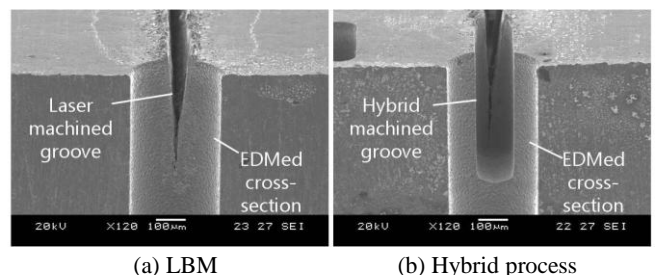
Cross section of micro groove machined by LBM and hybrid process
